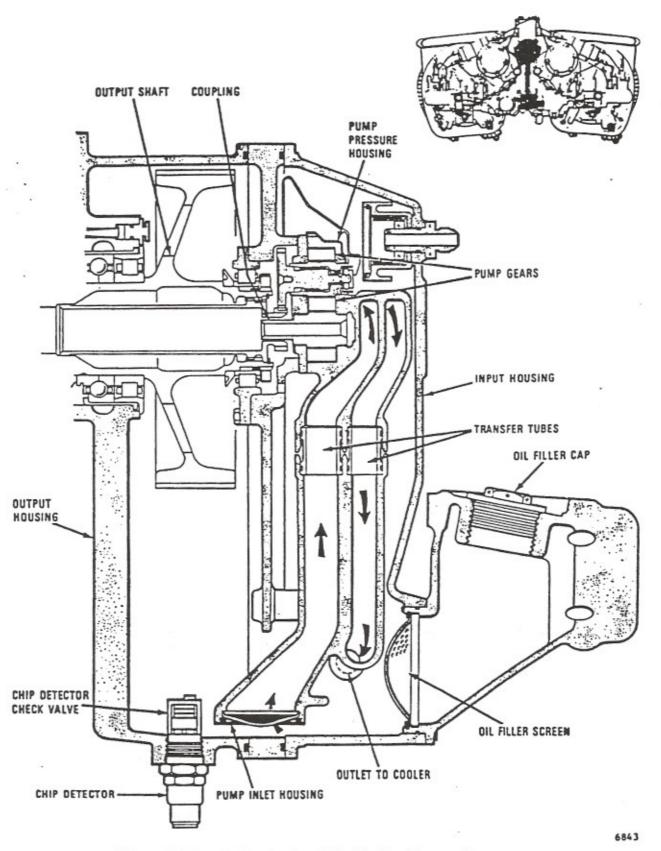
Reduction Gearbox Output Section Pressure Pump
